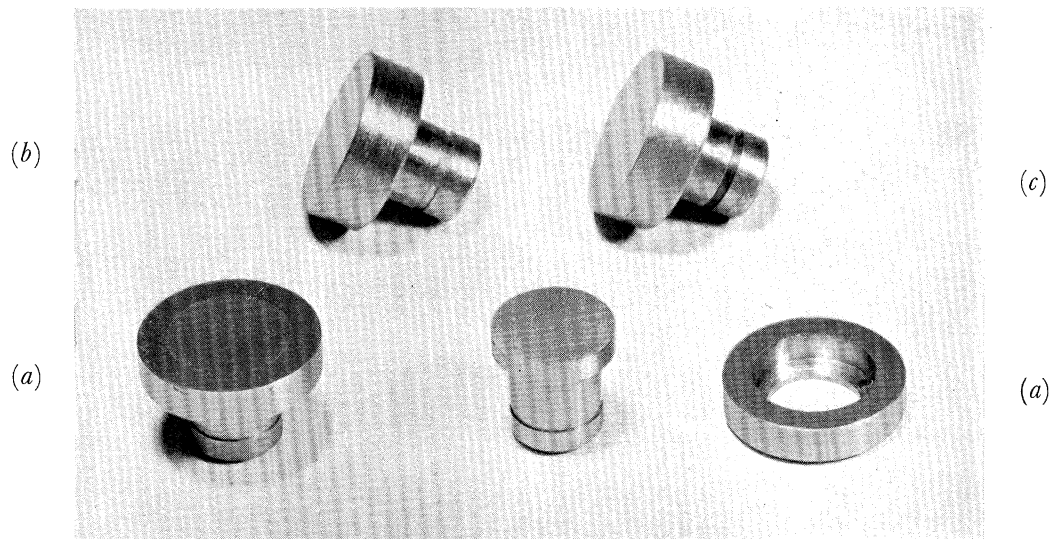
Types of erosion test specimen: (a) specimen with guard ring; (b) one-piece specimen; (c) brazed composite specimen.
